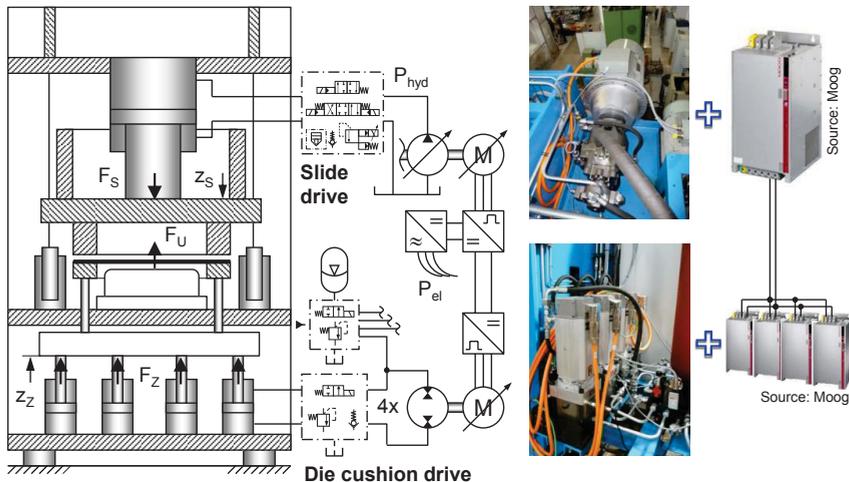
Hydraulic deep drawing press with pump controlled die cushion drive
